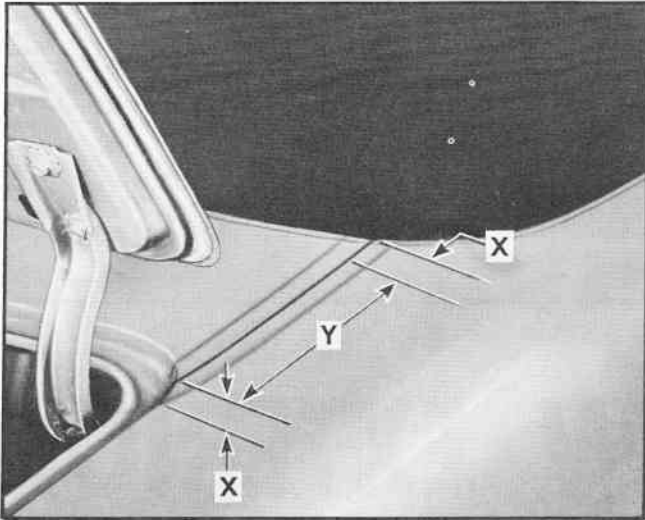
Rear Quarter Outer Panel Weld
